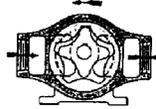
INTERNAL GEAR PUMP (without crescent)
